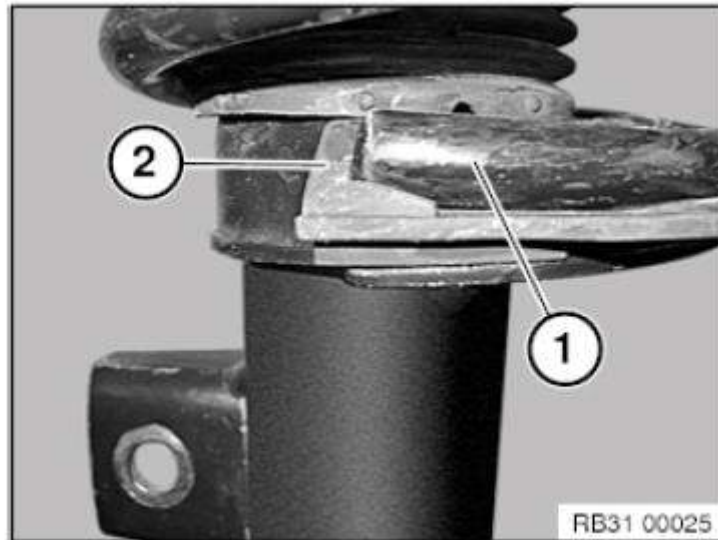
Identifying Lower End Of Coil Spring Flush With Spring Pad
